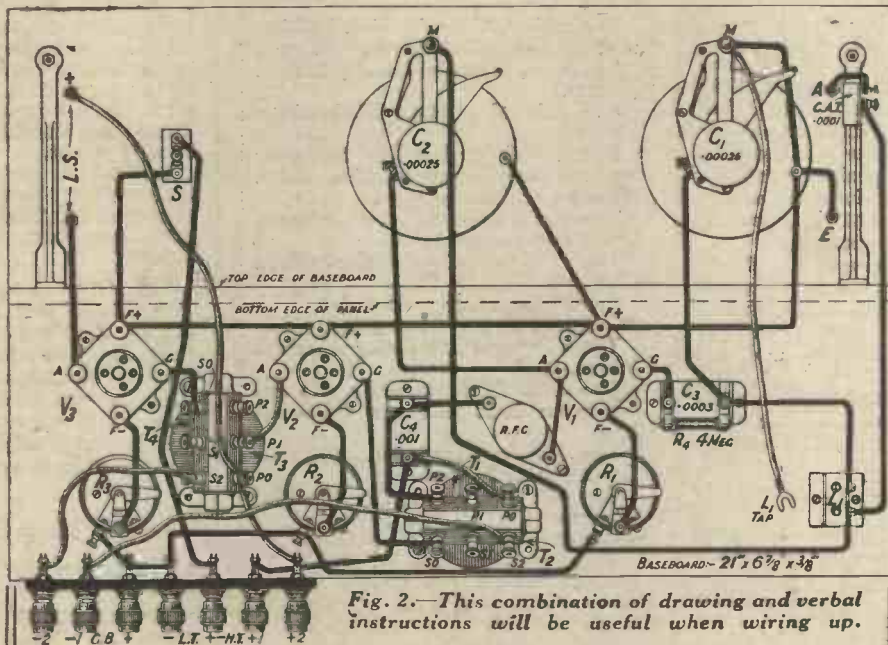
This combination of drawing and verbal instructions will be useful when wiring up.
